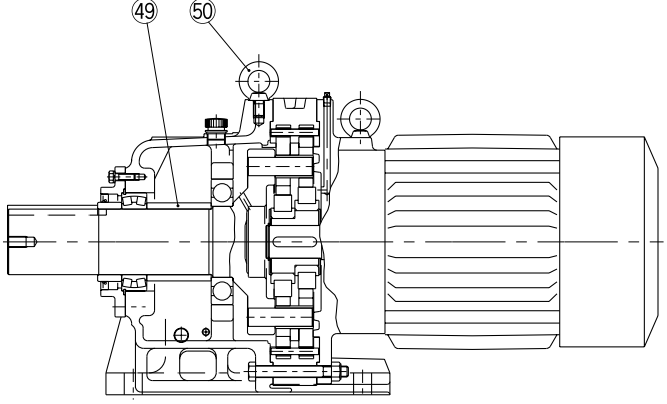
Type CNHM (Horizontal • Gearmotor)
